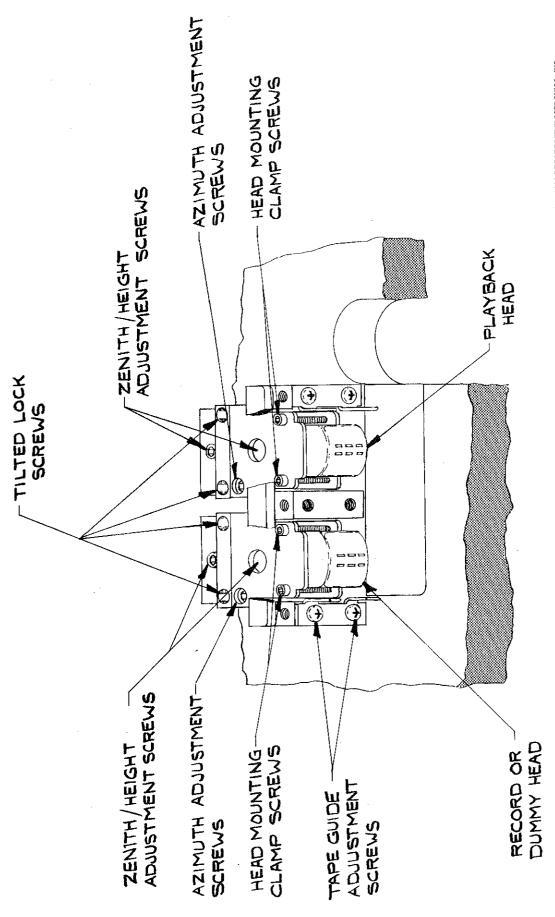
HEAD, TAPE GUIDE, AND MOTOR ADJUSTMENT
